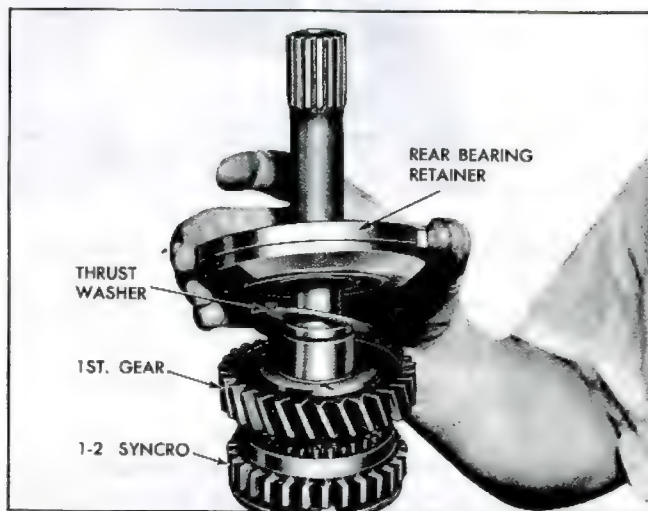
B-14—Installing 1-2 Synchronizer, First Gear, and Rear Bearing Retainer on Mainshaft
